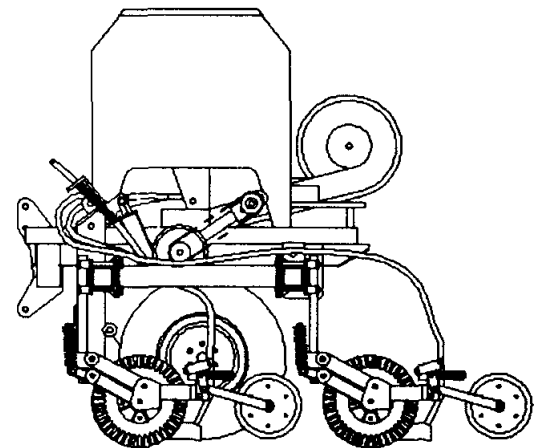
Side view of drill showing attachment of seeder coulters to either toolbar.
